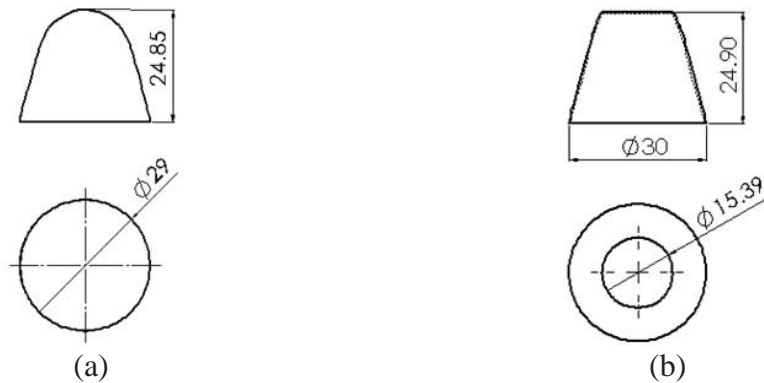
Dimensions of (a) inner core, (b) outer shell.
